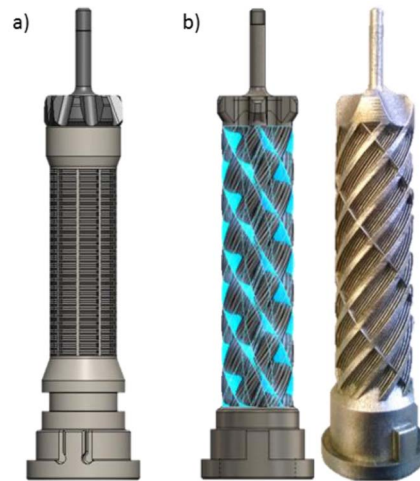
Pad screen improvement showing a) original CAD model and b) redesigned AM CAD model with actual part
